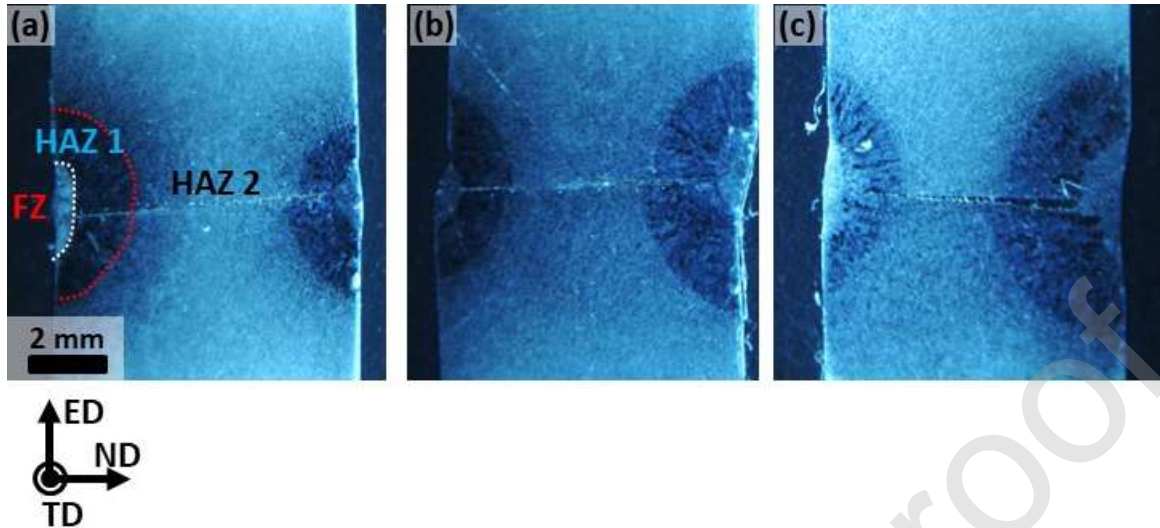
Welded butt joints of the 8 ECAP passes sample at different conditions, (a) 100A-8V-45s, (b) 125A-10V-45s, and (c) 150A-10V-45s.
